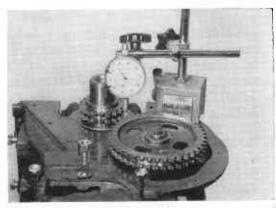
Checking Camshaft Gear and Crankshaft Gear Alignment
